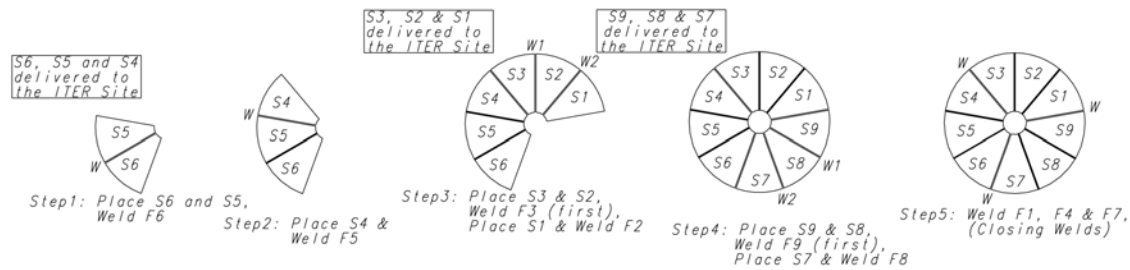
Assembly Sequence of the VV Sectors in the Pit
